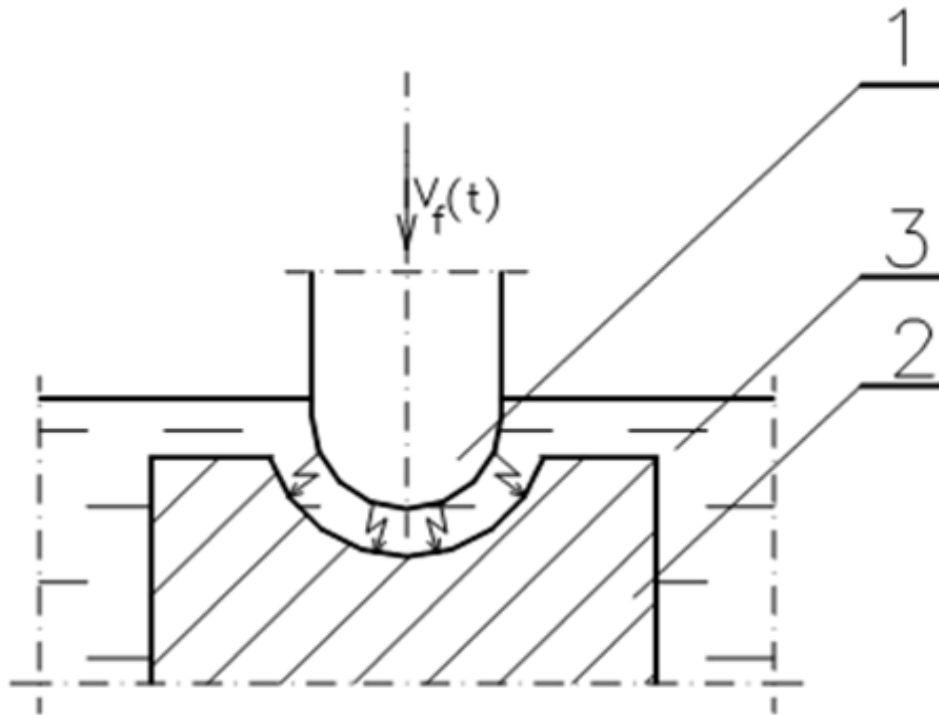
Scheme of Electrodischarge Machining (EDM): 1 – electrode-tool (cathode); 2 – workpiece (anode); 3 – container with dielectric: $V_f(t)$ velocity of electrode-tool displacement
